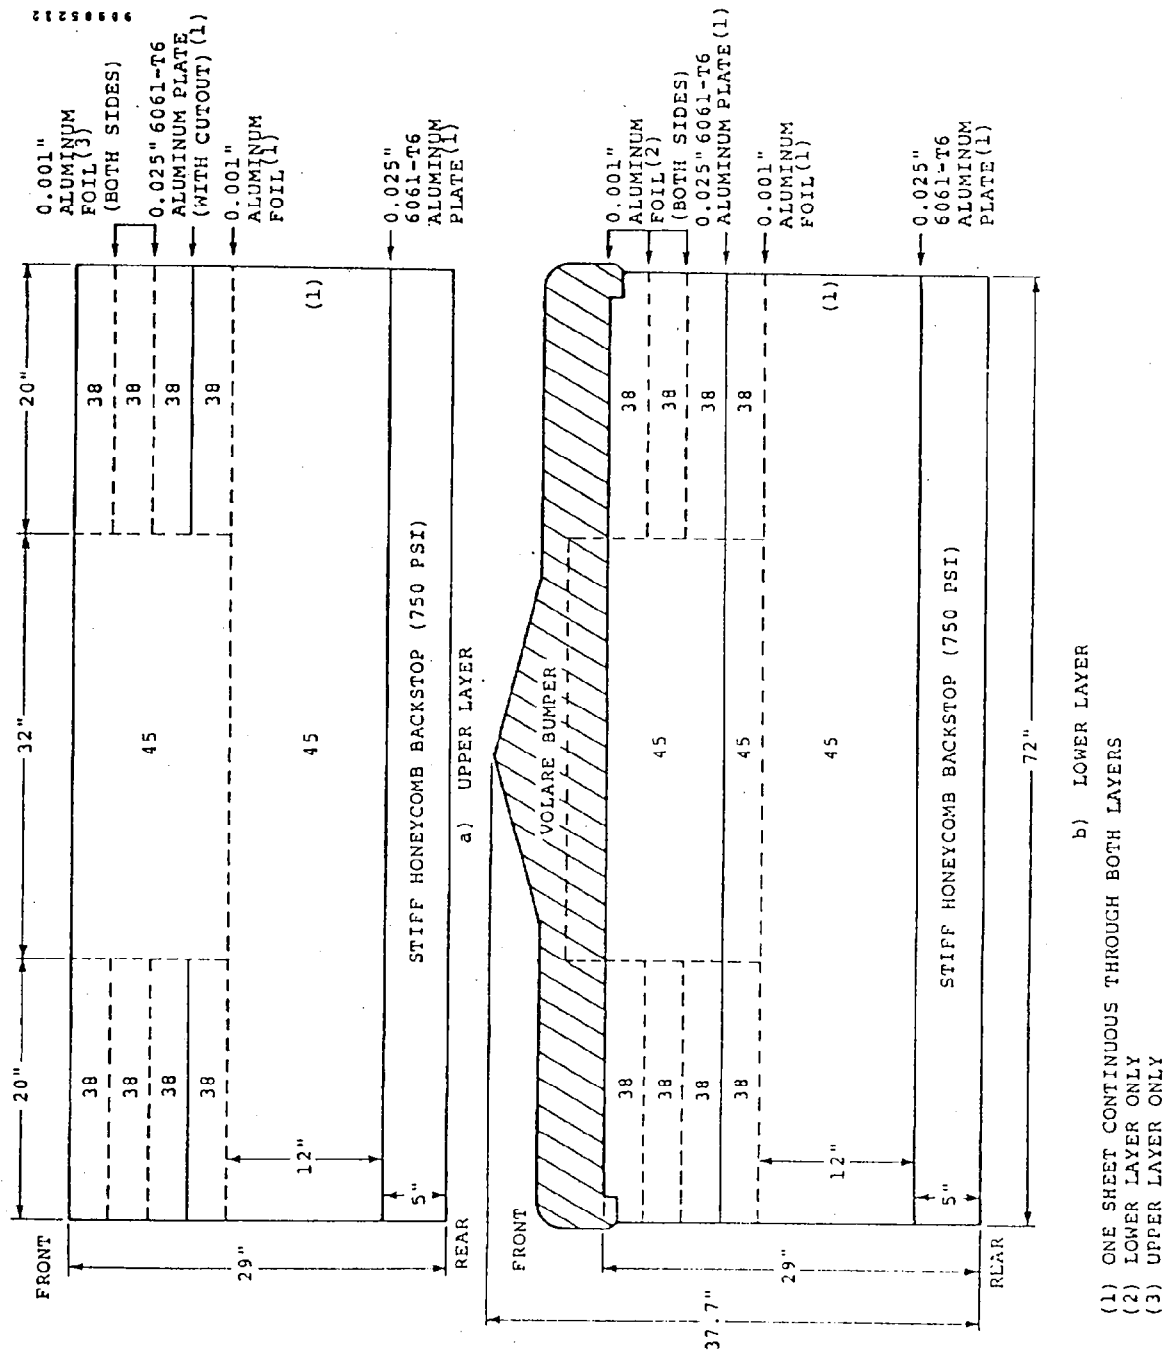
Top View Schematic of -9 Assembly Honeycomb Face Showing Crush Strengths (psi) of Honeycomb Blocks (Test 4.7).
